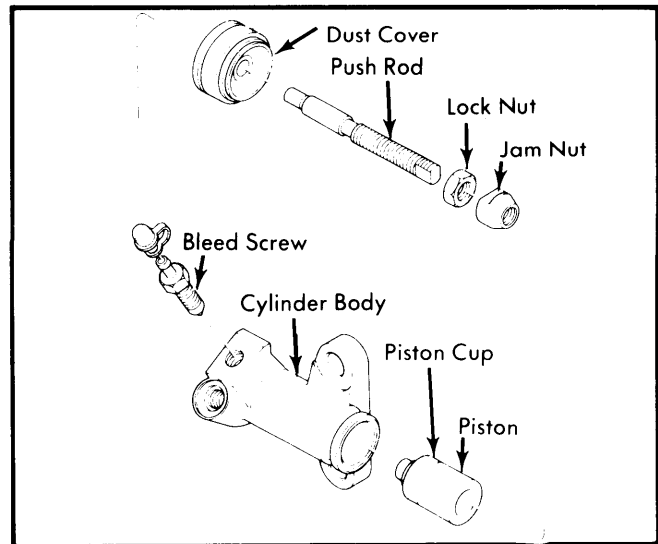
Exploded View of 210 Clutch Slave Cylinder
